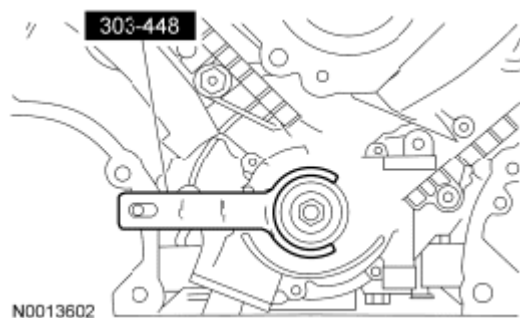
Identifying Crankshaft With Crankshaft Holding Tool
